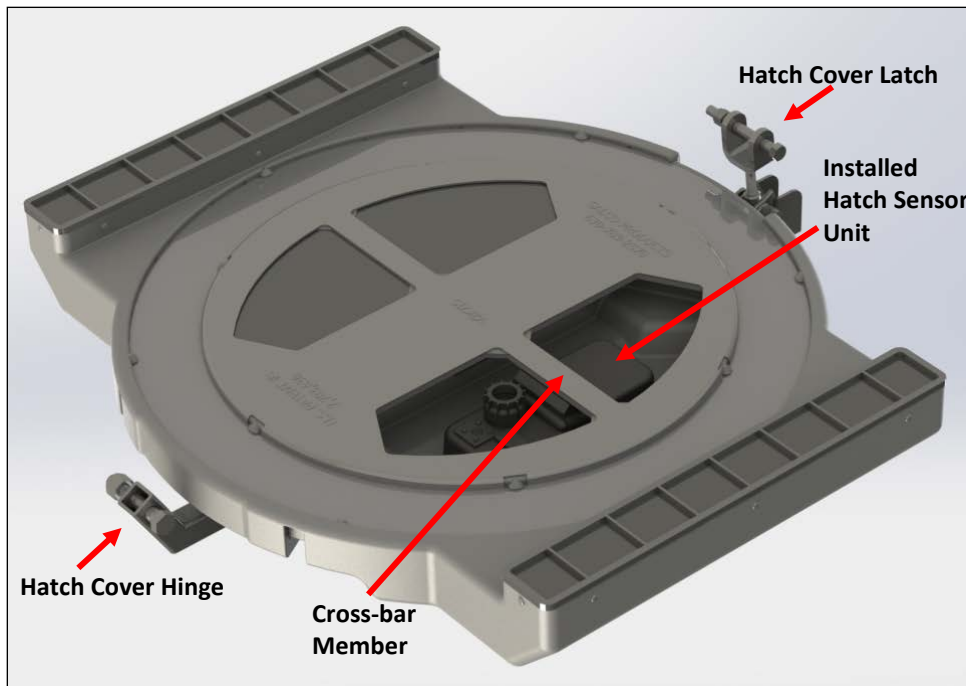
Installed Hatch Sensor Unit and Parts of the Hatch Cover
